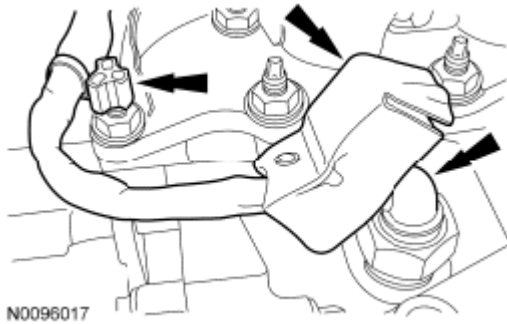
Locating Block Heater Wiring Harness Retainers & Block Heater Wiring Harness
